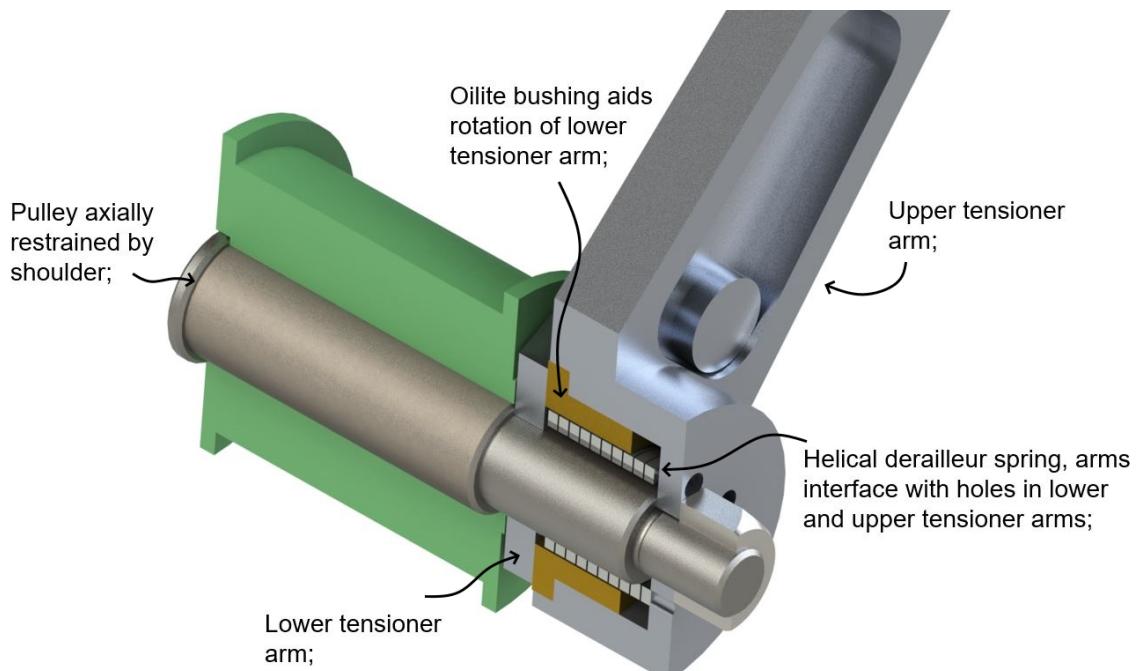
Annotated cross section view of the tensioner sub assembly;
